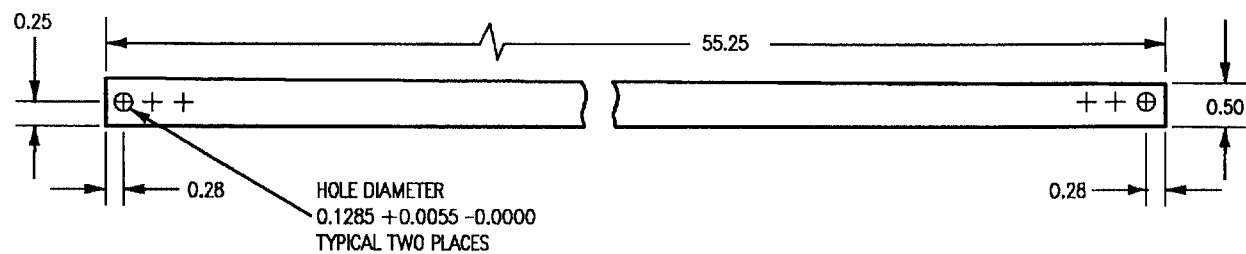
Former 74A331679 Outboard Lower Flange Repair
